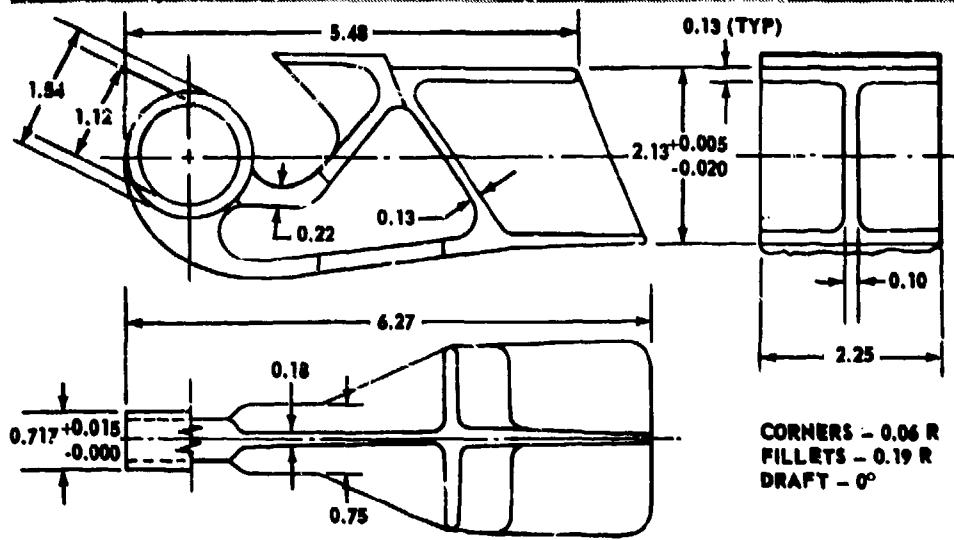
BELL CRANK FORGED TO PRECISE DIMENSIONS BY SPLIT-DIE FORGING TECHNIQUE⁽²⁾
